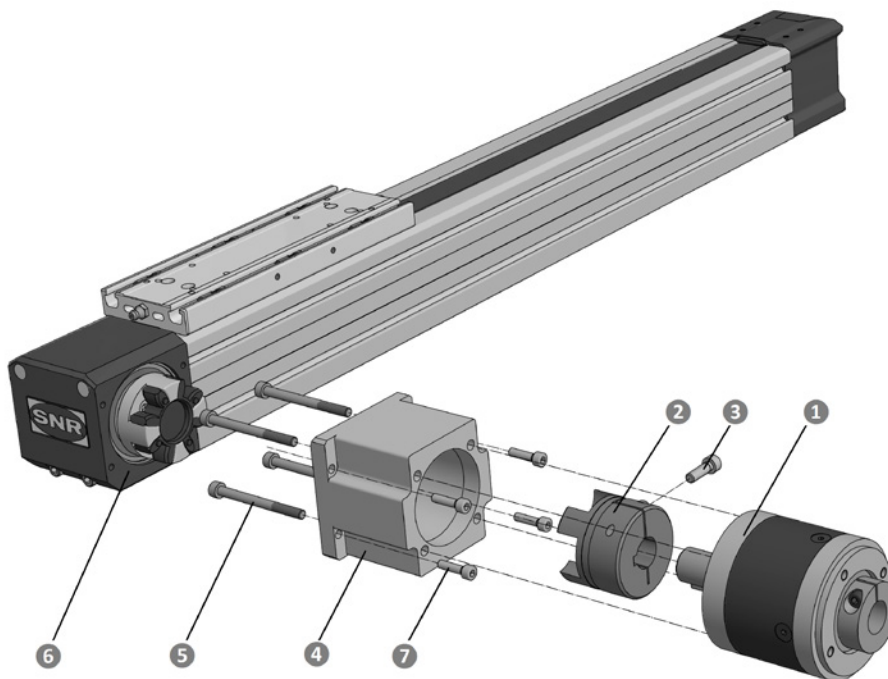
Mounting of planetary gearboxes via coupling and coupling cone
